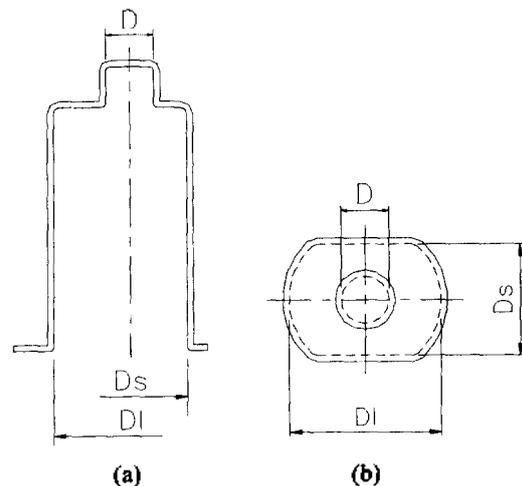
Geometry of elliptical deep drawing product. (a) Side view of product. (b) Body shape of product
